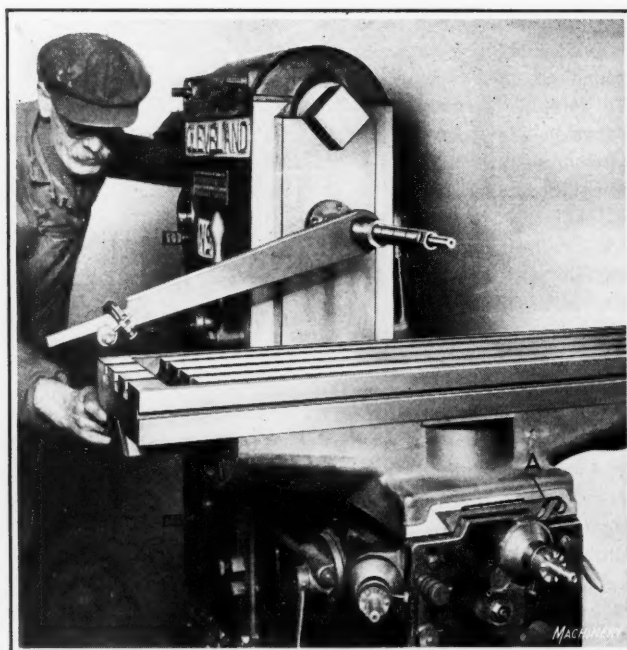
Arm and Indicator used in squaring up the Table with the Spindle
